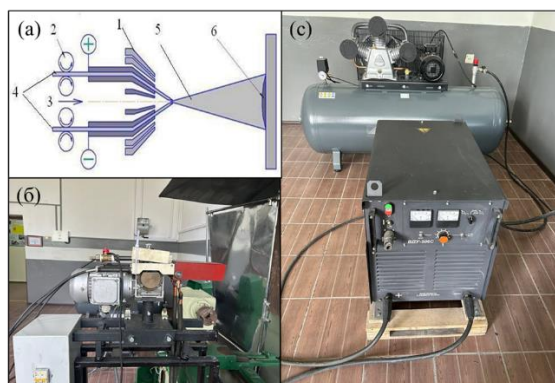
a) Flow chart of electric arc metallization (1 – metallizer body; 2 – wire feed mechanism; 3 – air supply channel; 4 – electrode wires; 5 – electric arc with sprayed wire particles; 6 – sprayed coating) b) external view of the gun; c) external view of the source and compressor.
